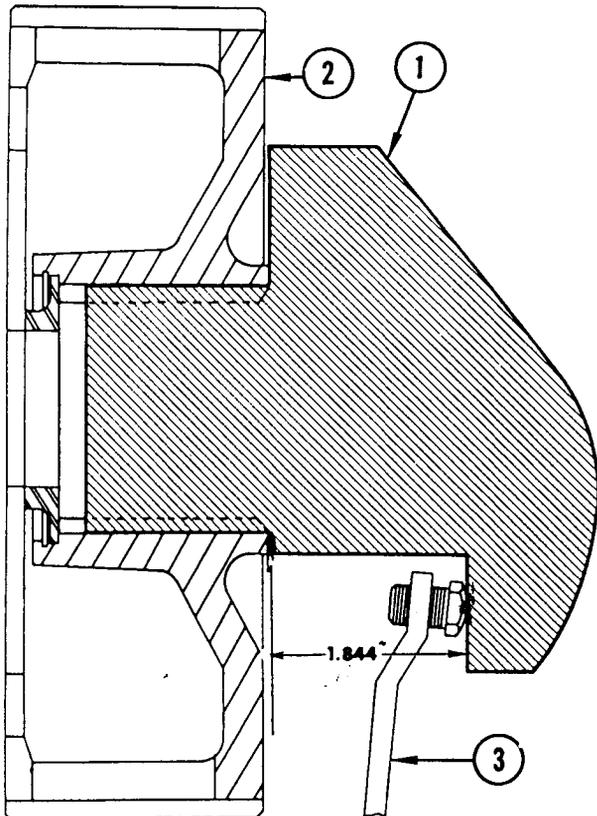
SPECIAL GAUGE FOR ADJUSTING CLUTCH
